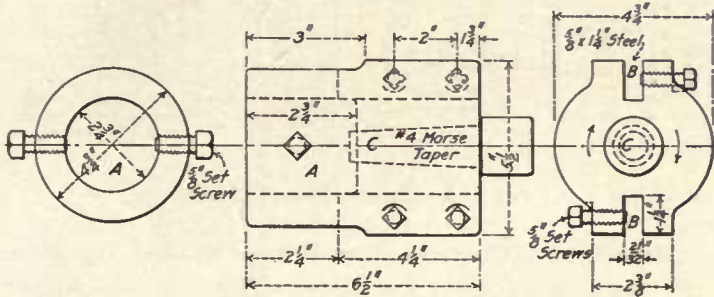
Rocker Arm Boss and Solid Oil Cup Turning Tool.
